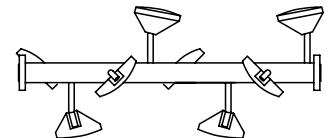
### DETAILS OF STANDARD SANIMIX CONSTRUCTION
